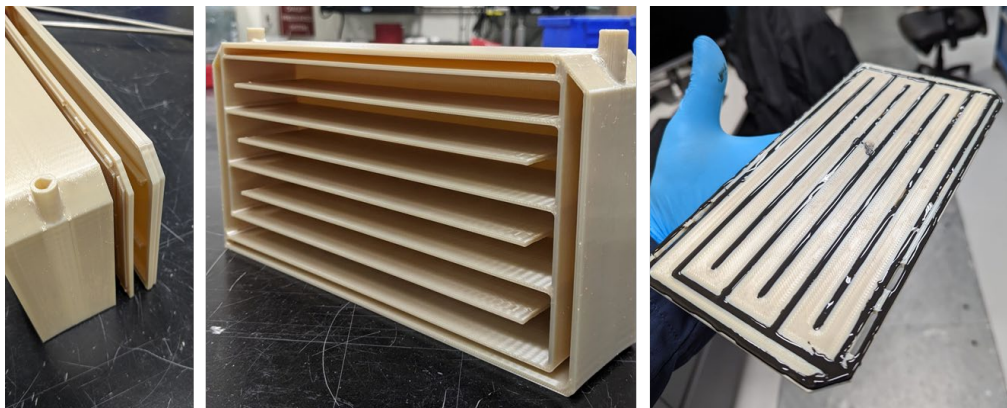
3-D printed prototype v3.1 parts prior to assembly (left and middle); front enclosure with Stycast 2850FT epoxy (black) during final assembly (right)
